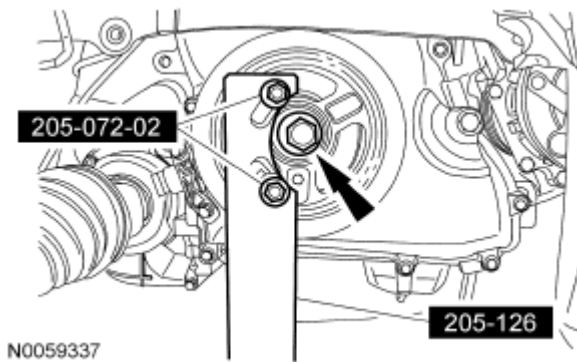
Identifying Special Tools Assembly (205-072-02, 205-126) And Crankshaft Pulley Bolt
